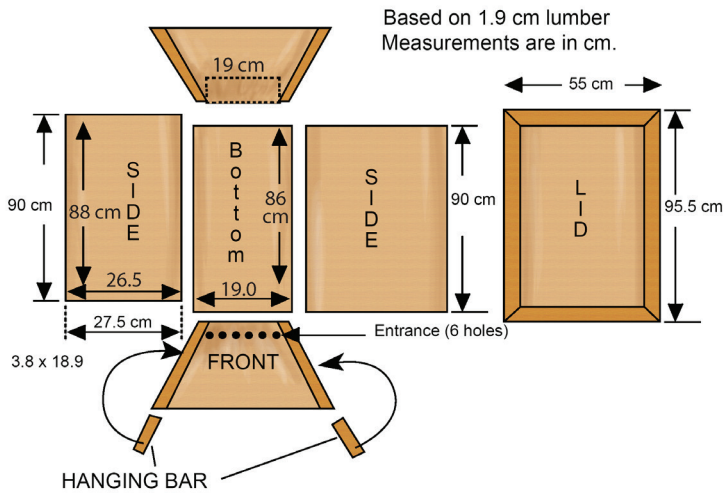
(a) Dimensions of the parts of a Top Bar hive
